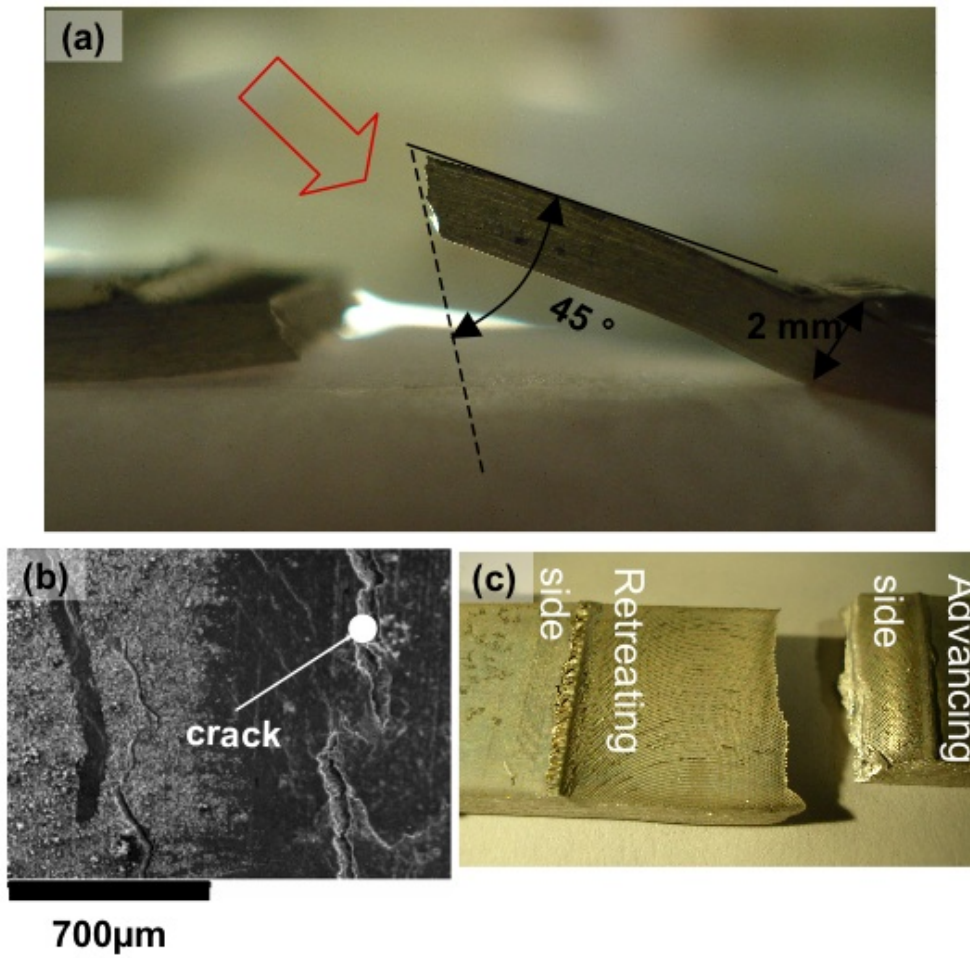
Fracture location in AZ31 FSW butt welds: (a) 45° fracture, (b) crack on the bottom surface and (c) fracture in the advancing side TMAZ.
